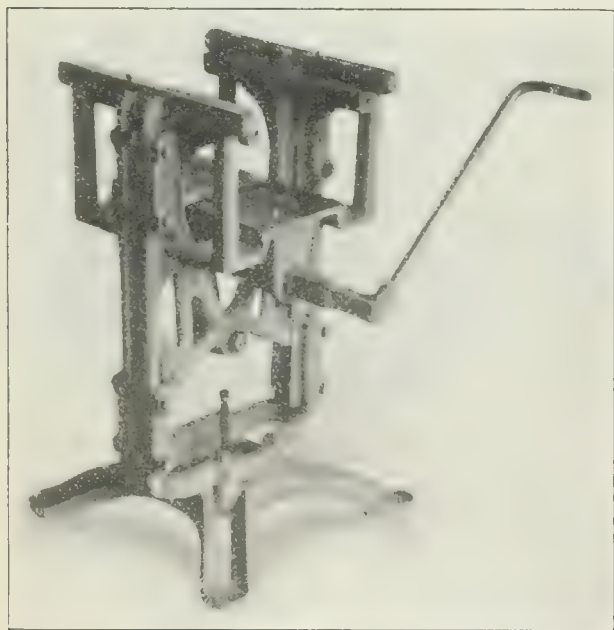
The Type T Molding Machine Built by the Edward A. Pridmore Company, Chicago, Ill.
